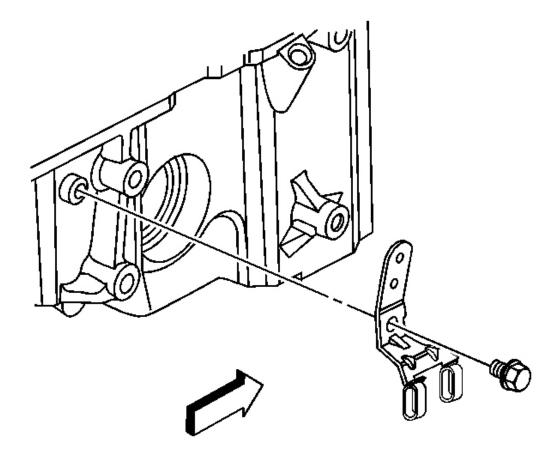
View Of Transmission Cover Bolt Courtesy of GENERAL MOTORS CORP.
